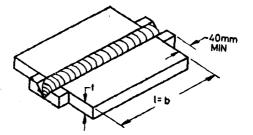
Butt Welded Joints with Run-on and Run-off Plates
